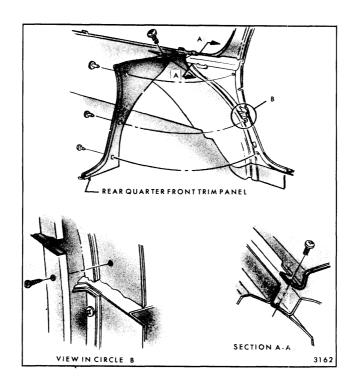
Quarter Front Trim Finishing Panel - "B" Station Wagon Styles
